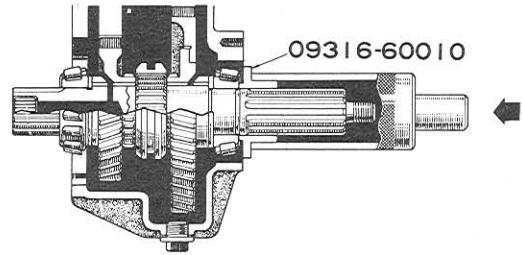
Transfer Output G2393 Shaft Rear Bearing Installation
